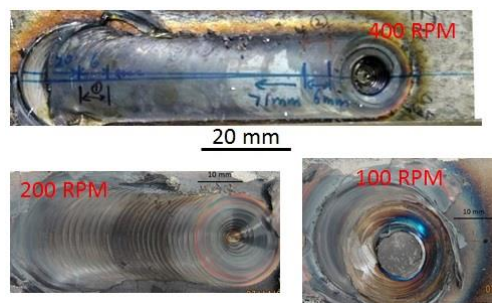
Eurofer'97 friction stir welds made with different parameters.
